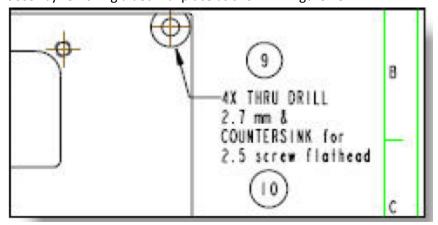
Callout for Less Expensive Countersink, Source: Pro CNC Inc.
